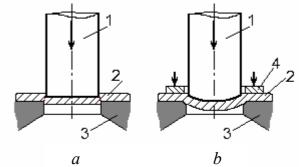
Scheme of die cutting (a) and cupping (b): 1 – punch; 2 – metal sheet; 3 – matrix; 4 – hold-down tool
